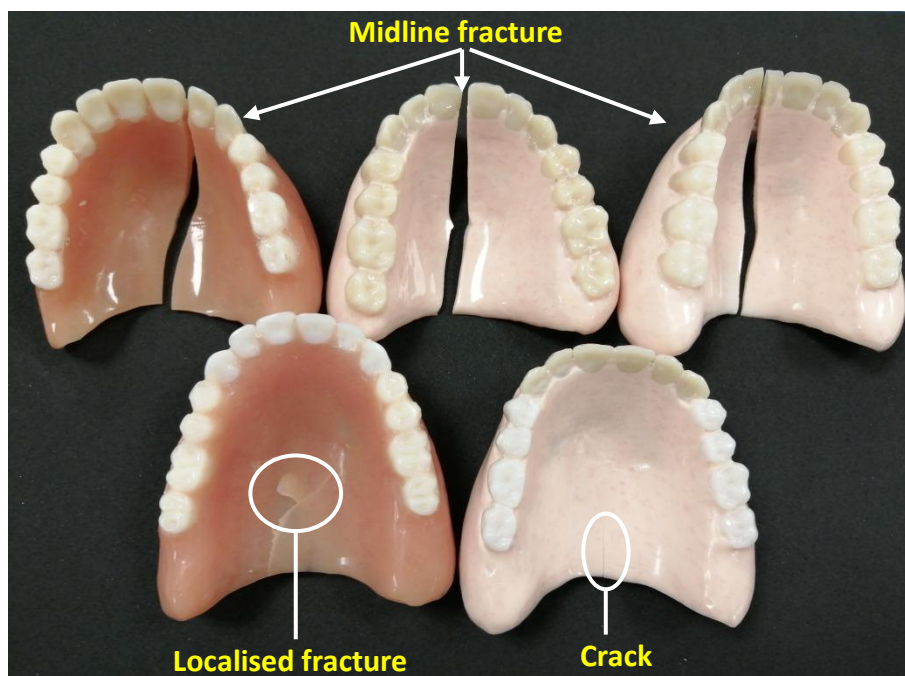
Photographs showing the failure modes observed in the dentures during the bending tests: Midline fracture, Localised fracture and Crack.
